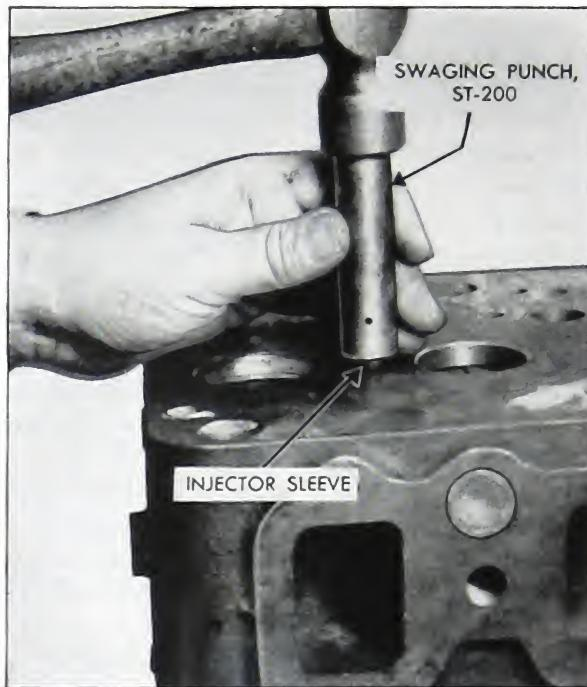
Sealing lower end of the injector sleeve "B"
